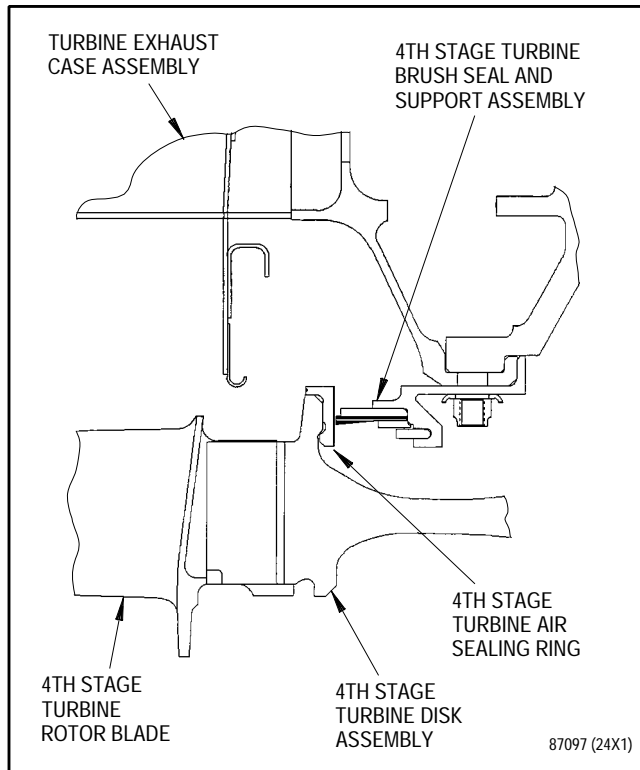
A. Fourth Stage Turbine Brush Seal and Support Assembly and Fourth Stage Turbine Air Sealing Ring - Configuration
